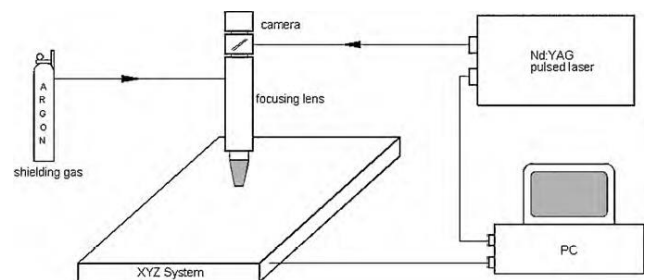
Schematic of typical pulsed Nd:YAG laser welding system[17]
